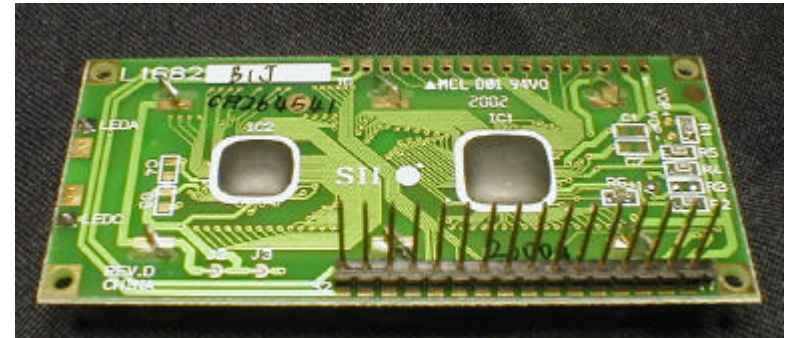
Bottom view of display LCD panel showing header connector that mates with JP2 on the CPU board.
